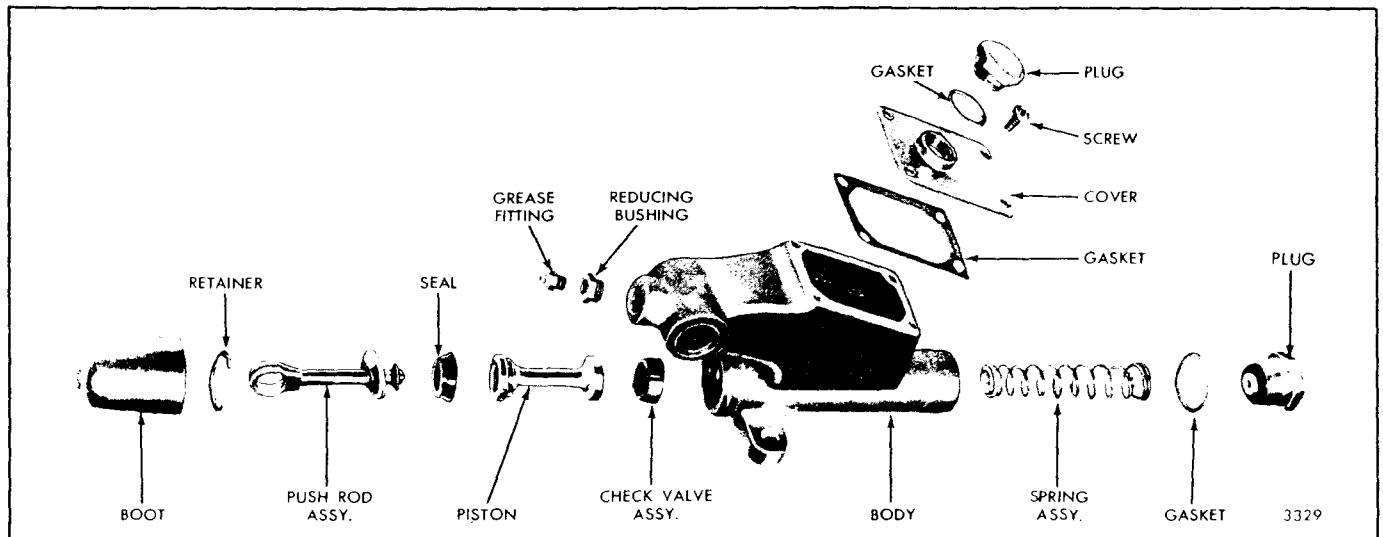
Hydraulic Starter Remote Control Master Cylinder Details and Relative Location of Parts
